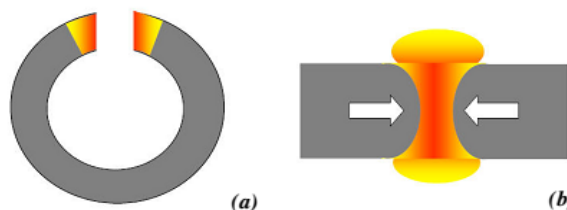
Illustration of (a) heating of the coil edges and (b) forging in HF induction welding for pipe production
